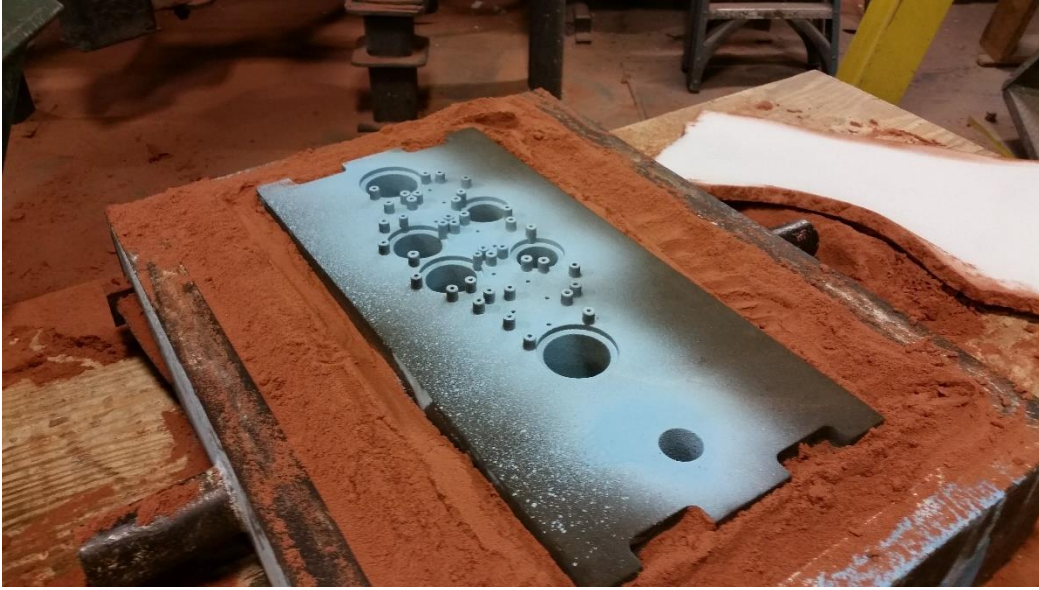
One of two molds, surrounded by packed sand in a flask, before filling.
